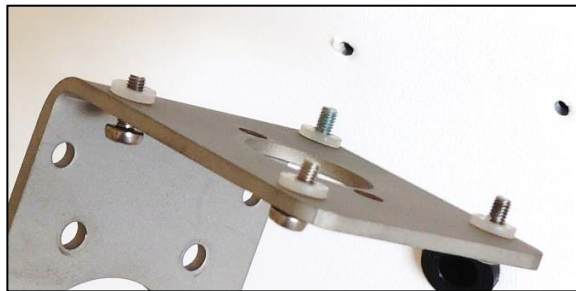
Secure the screws to the bracket with the plastic O-rings from the kit.
